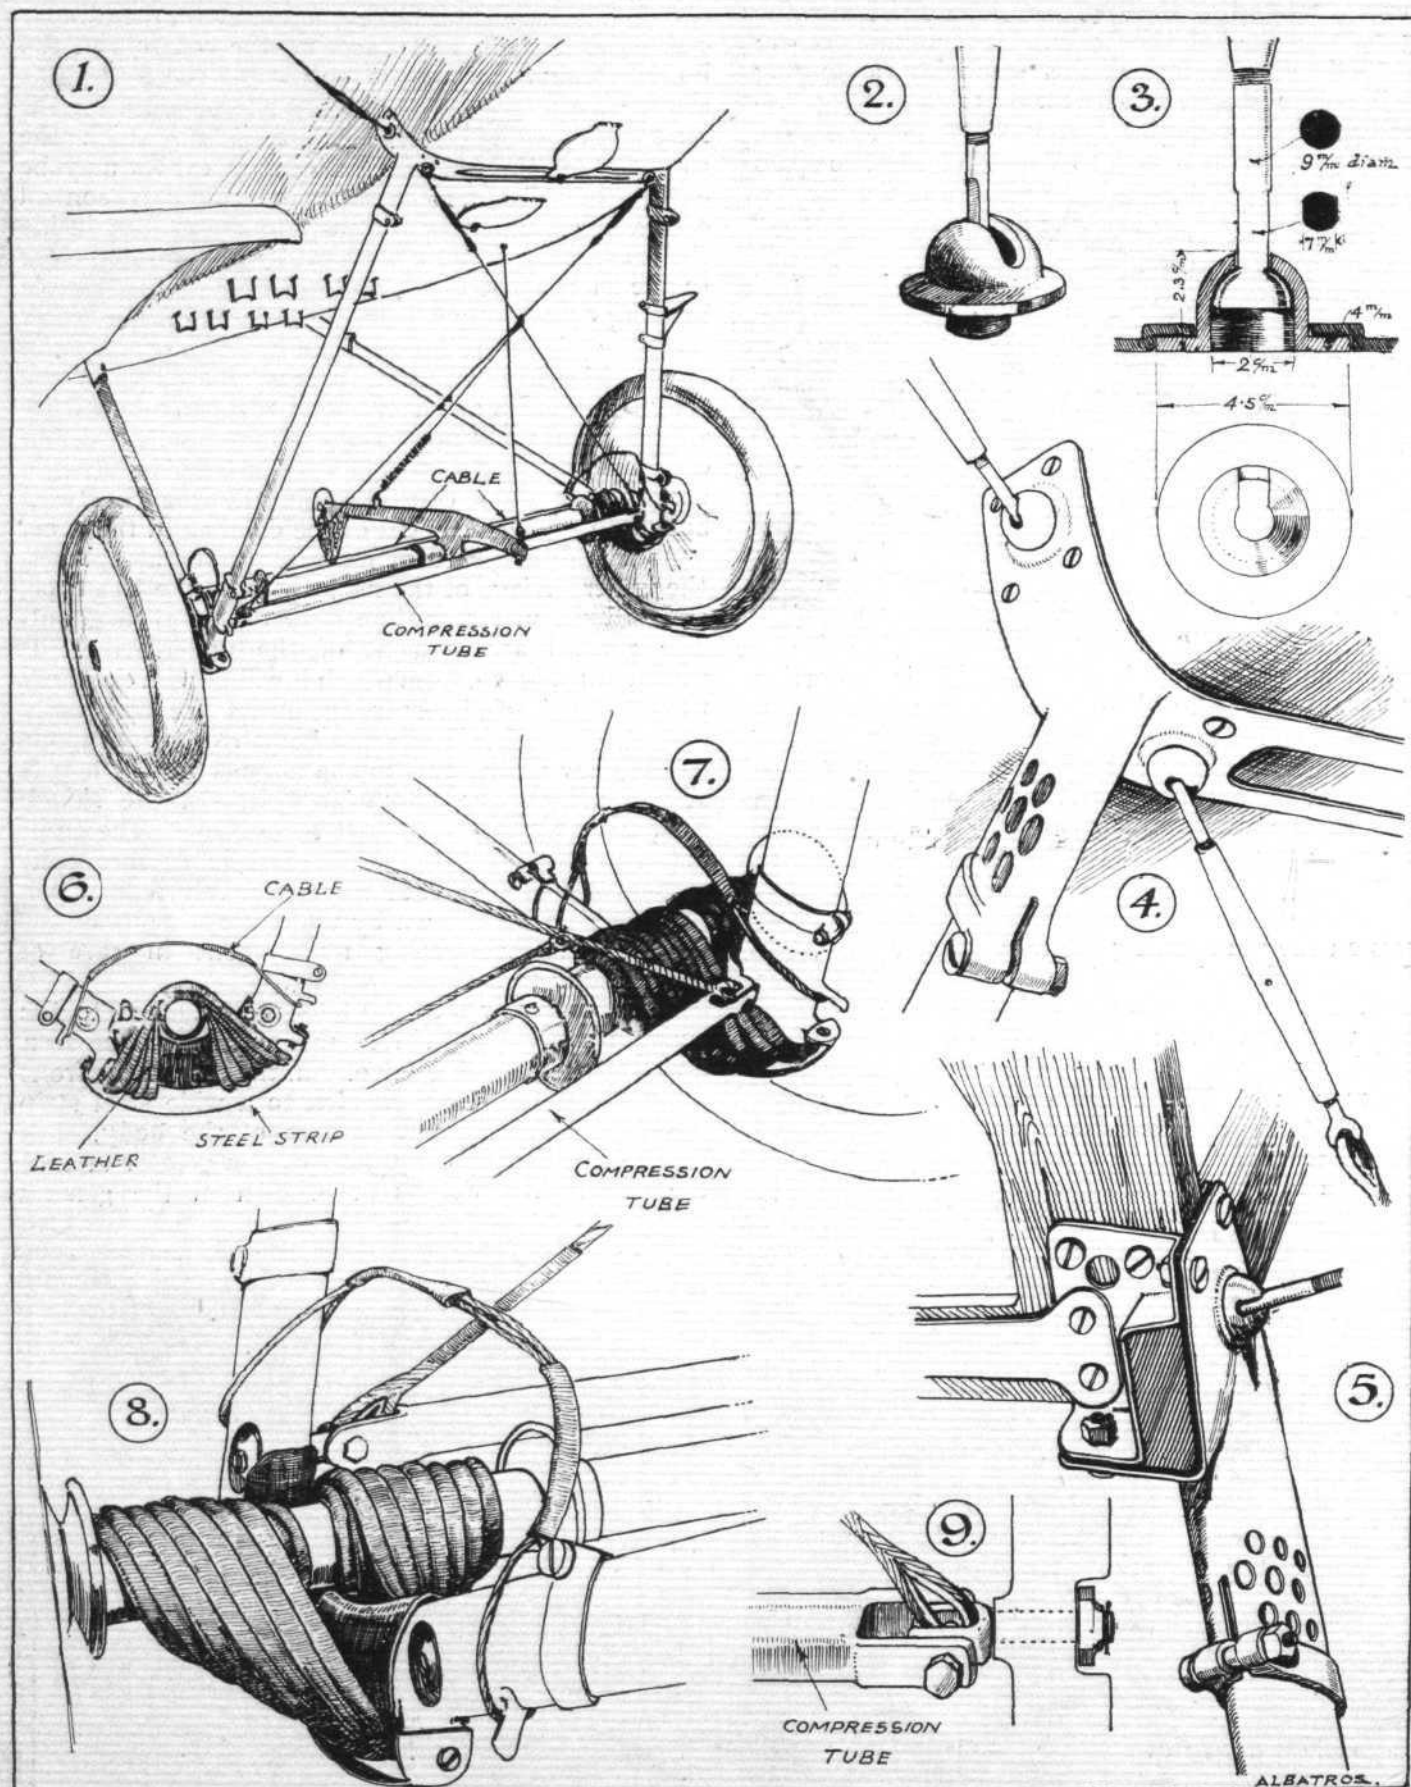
Some details of the undercarriage of the Albatros. 1. General arrangement of the undercarriage. 2 and 3. Detail of cable terminal. 4. Steel strip passing under body, to which is welded the front chassis strut socket. 5. Attachment of rear chassis strut to body. 6. Lower attachment of chassis struts and shock absorbers. 7, 8, and 9. Details of same.
